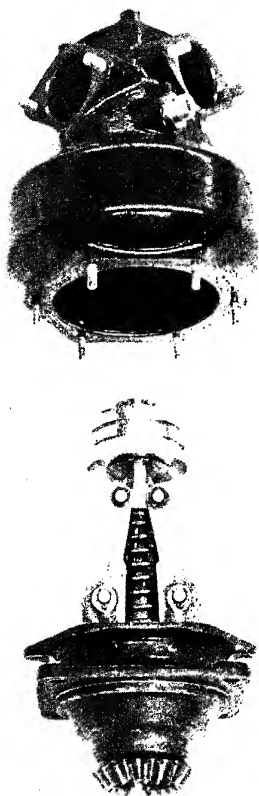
"BRISTOL" GUN-FIRE CONTROL GEAR
